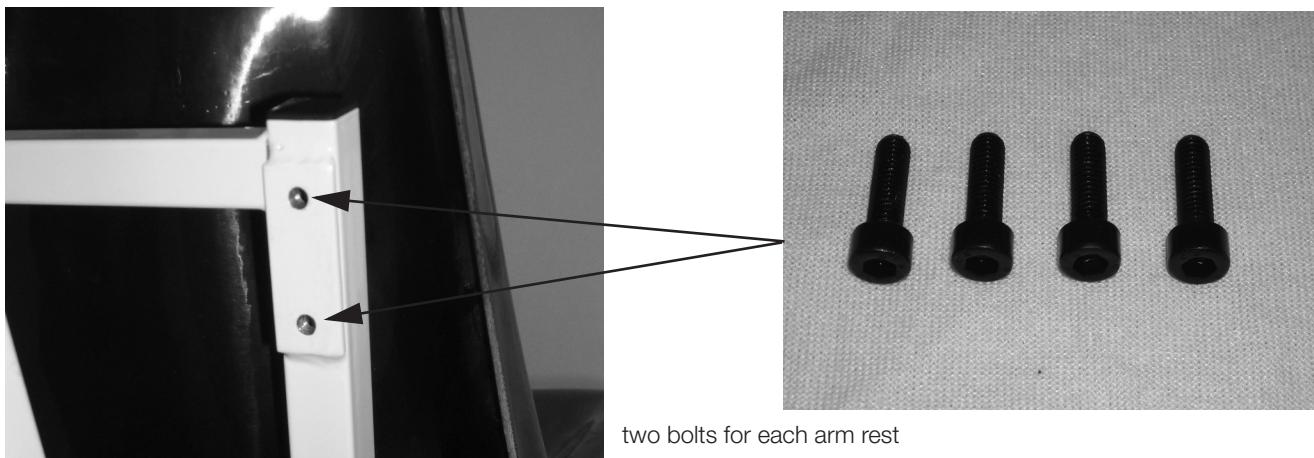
Hole Location and Four Bolts Used for Securing Arm Rest to Chair
